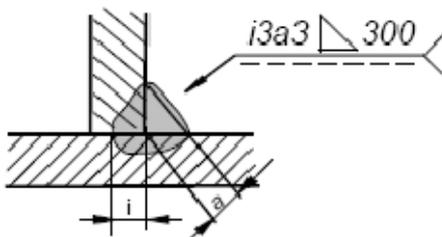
Definition of a-height and i-depth on fillet weld, example.
